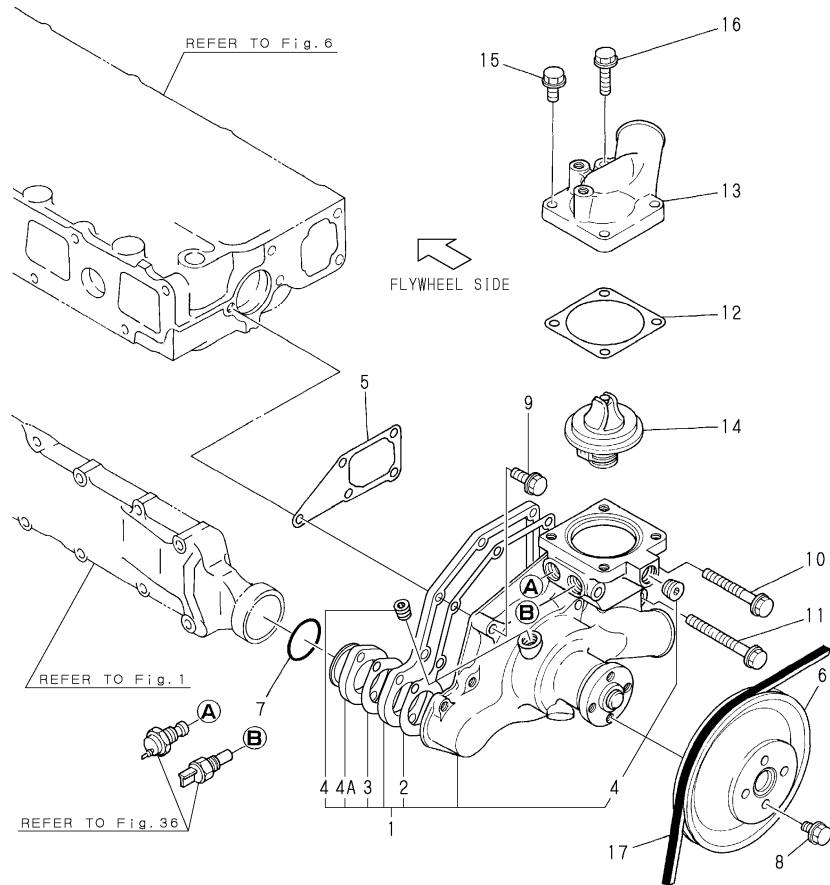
COOLING FRESH WATER PUMP & THERMOSTAT
